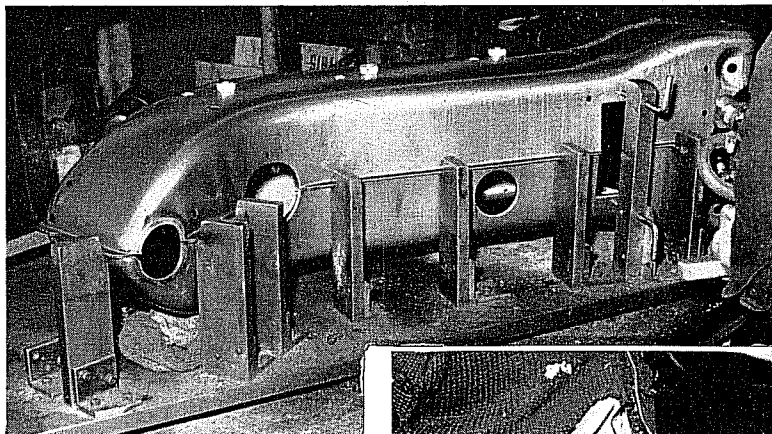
(left).—Main frame pressings jugged for tack spotwelding together
